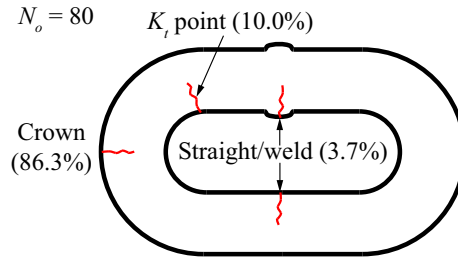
Obtained frequency of fracture locations from the $N_o = 80$ fatigue testing results of retrieved corroded chains.
